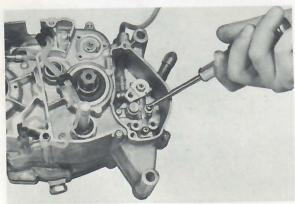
Loosening oil pump fitting screws with cross head screw driver
